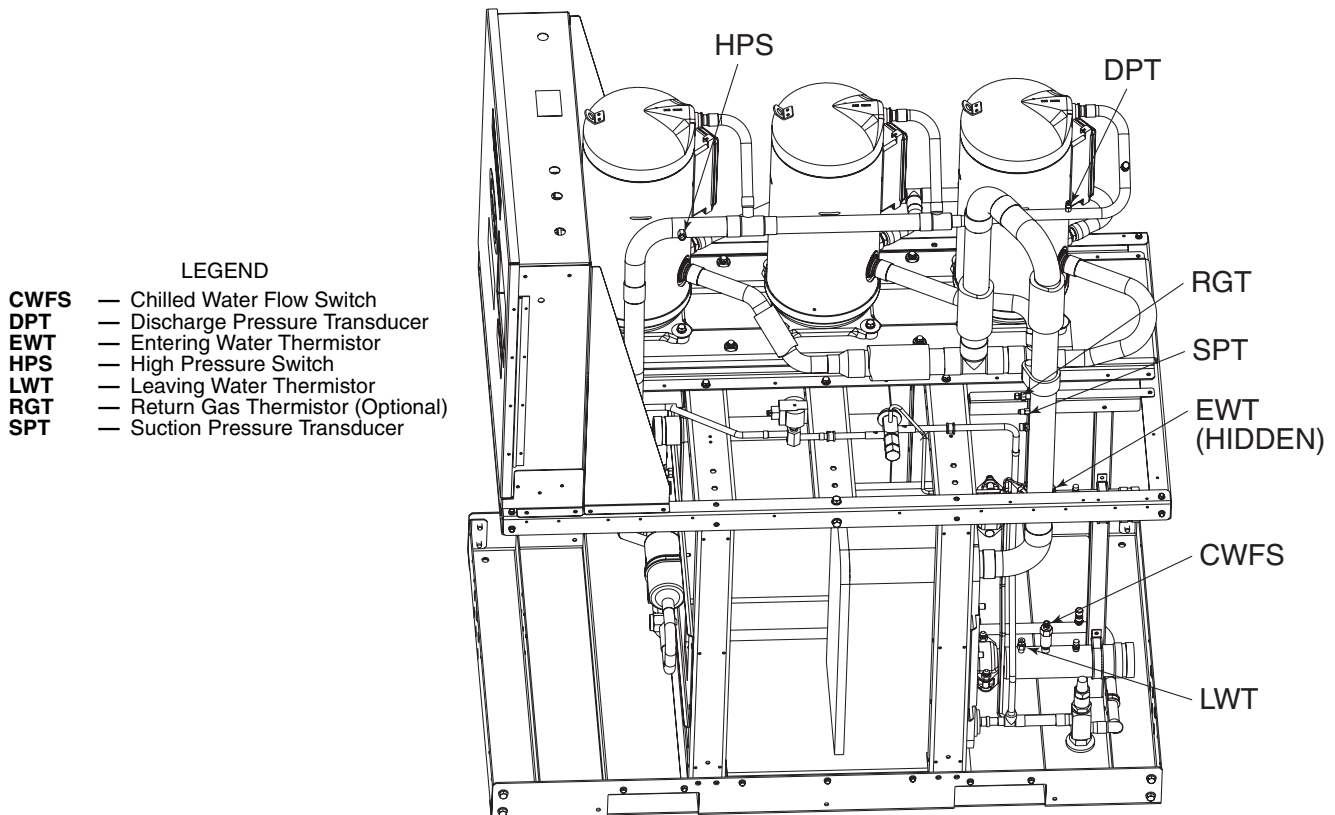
Compressor Location — 30MP015-045 Units (30MPW045 Unit Shown)
